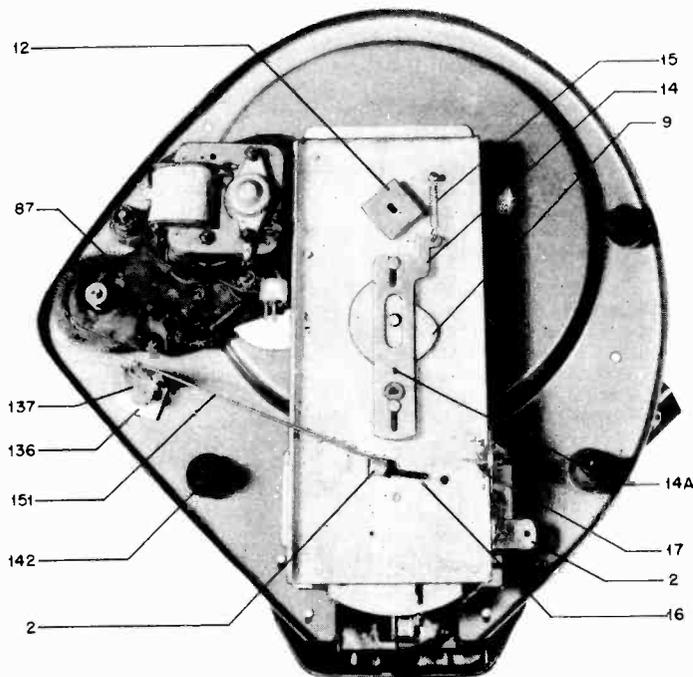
BOTTOM VIEW OF RECORD CHANGER
